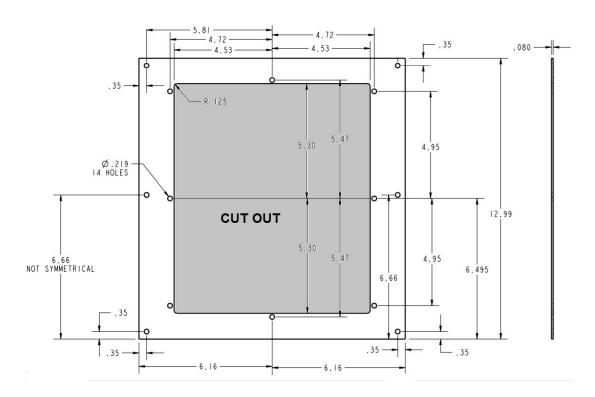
Mounting Plate P/N 603-0110 Not to Scale
